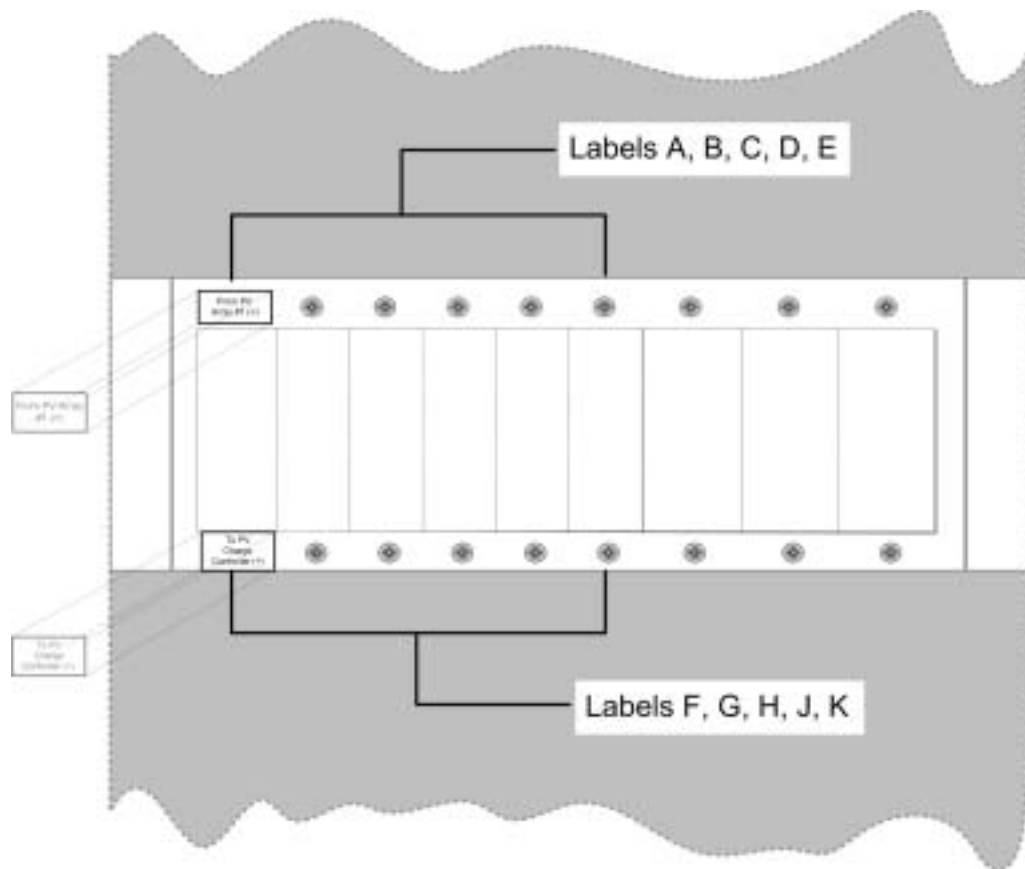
Label Placement on Mounting Bracket on the DCCB-L
